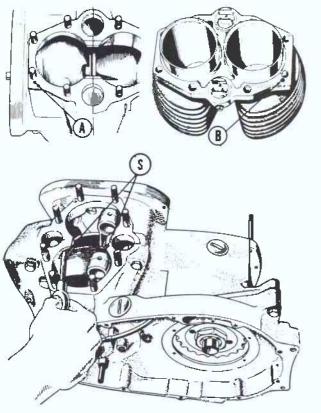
On later 650cc models, make certain hole in cylinder base gasket is over oil passages (A) in crankcase and (B) in cylinder,
